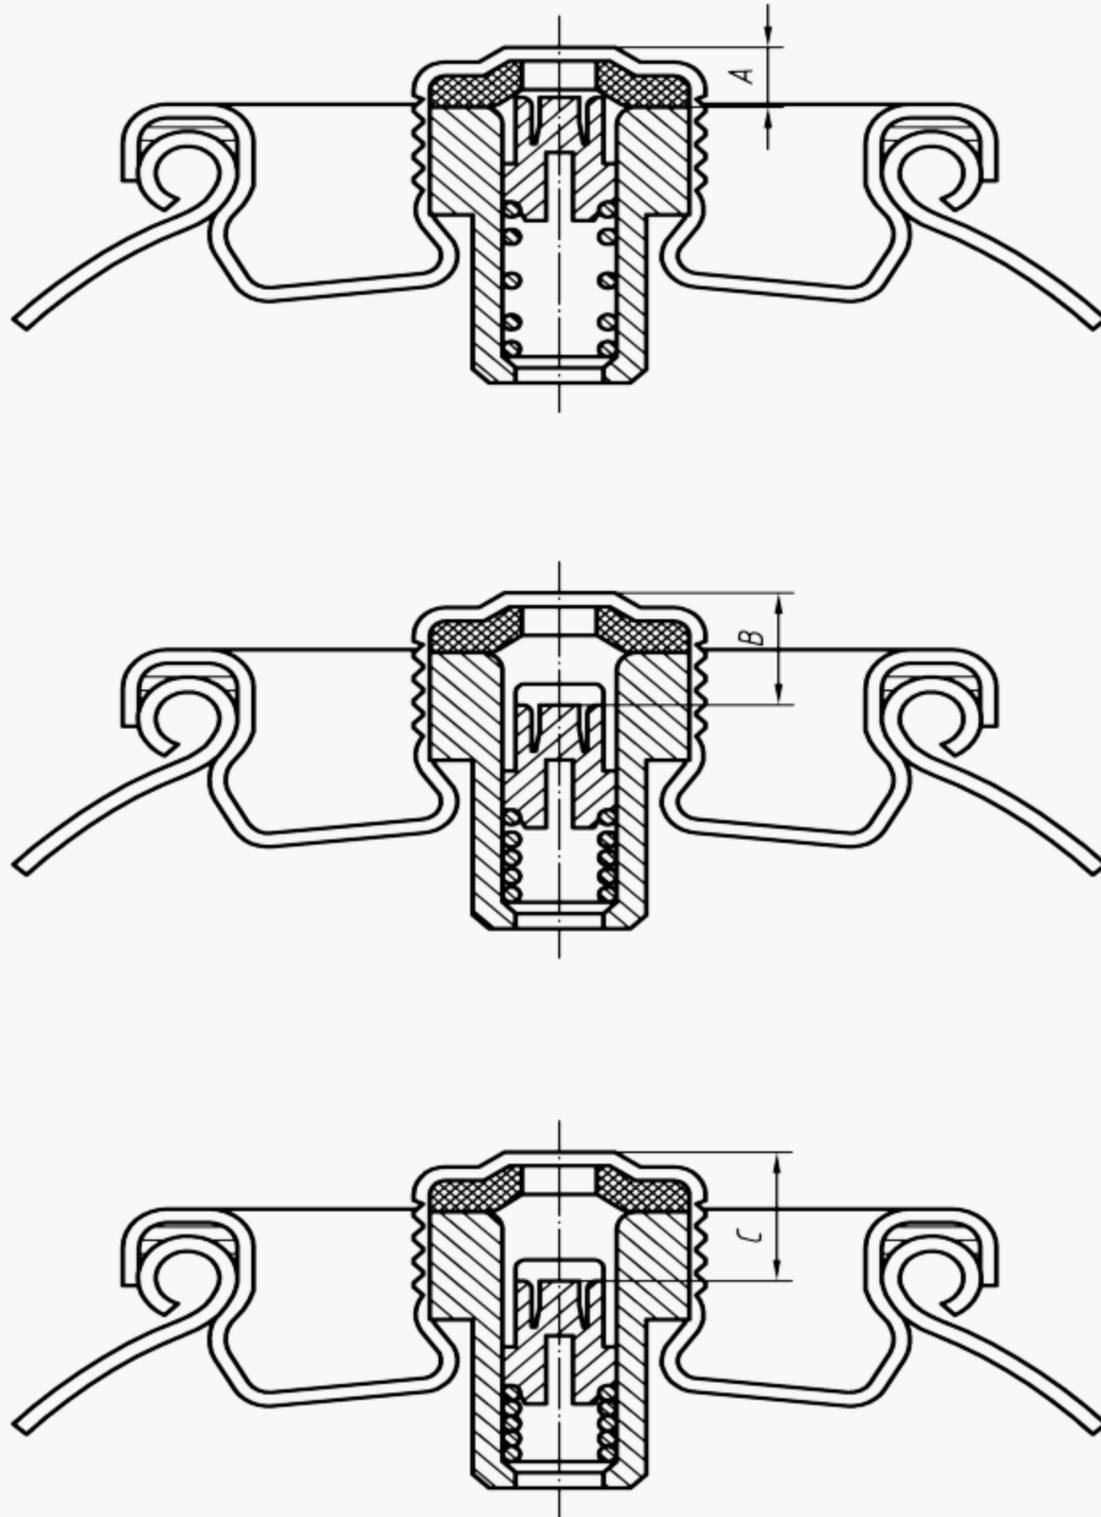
Section of a threaded centre boss valve cup (type 3)
